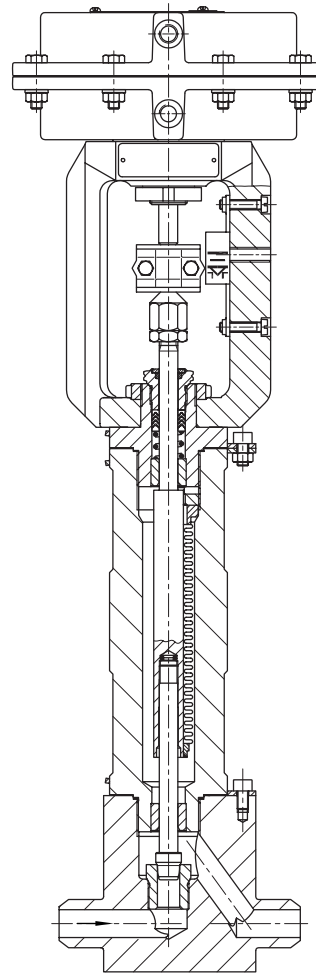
· Type 3252-1 High Pressure Valve with insulating section or bellows seal
